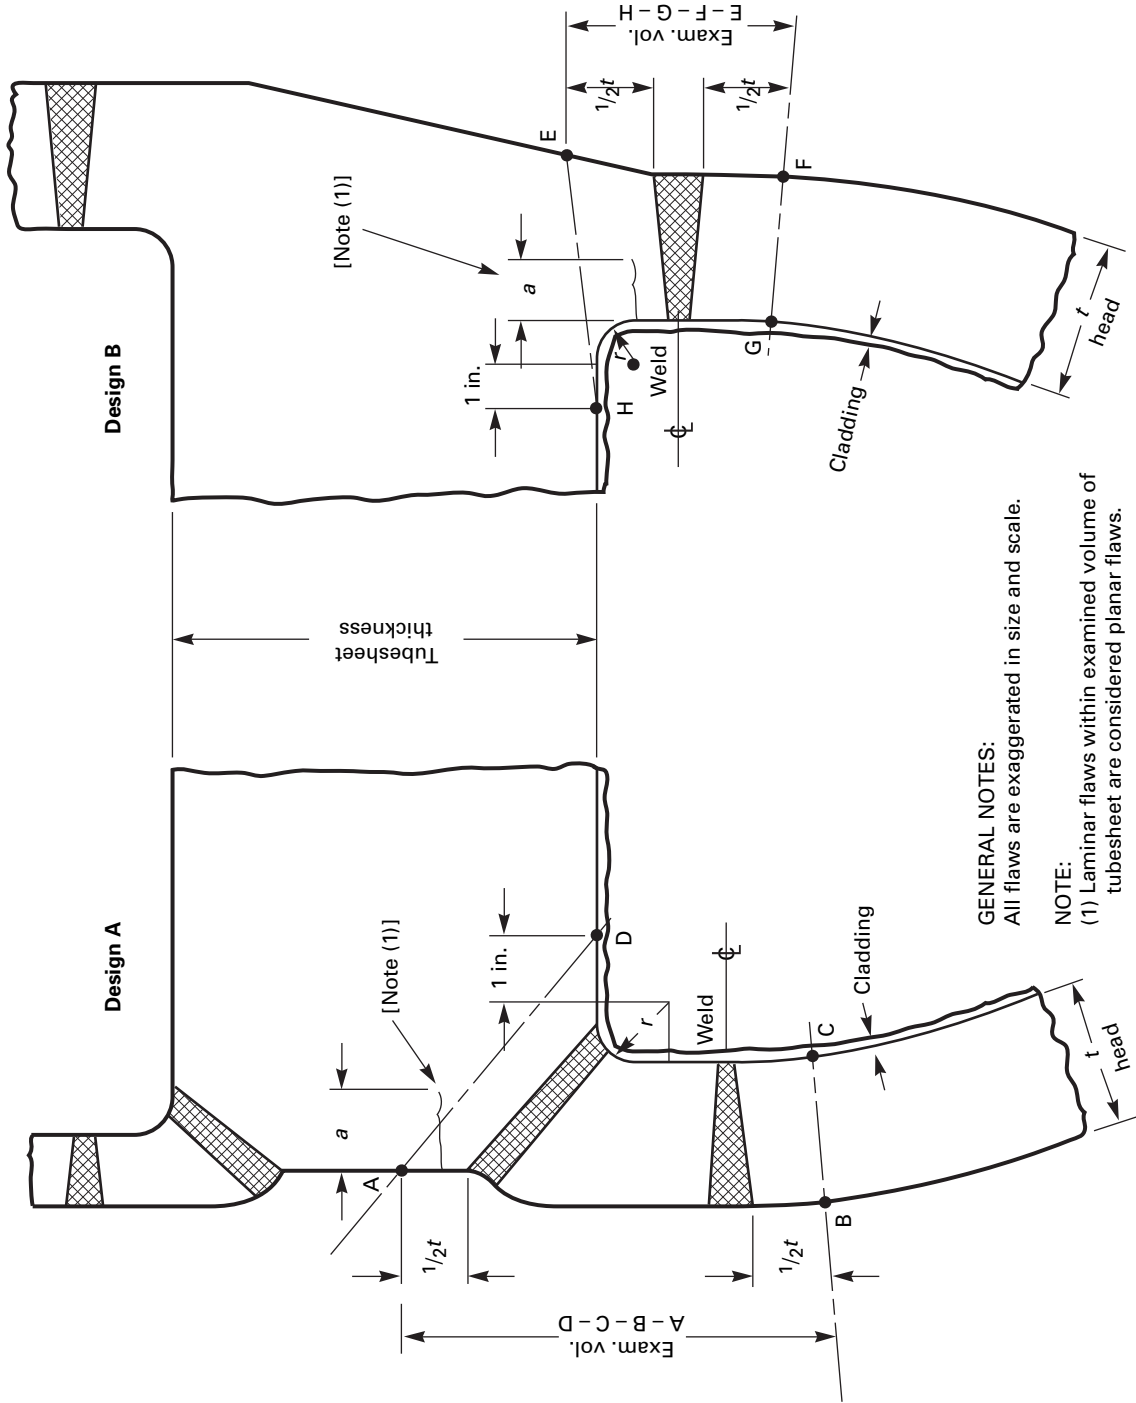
TYPICAL TUBESHEET-TO-HEAD WELD JOINTS
